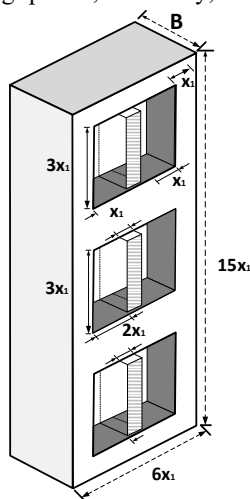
Designed form of three-phase HV transformer (geometry and dimensions)
